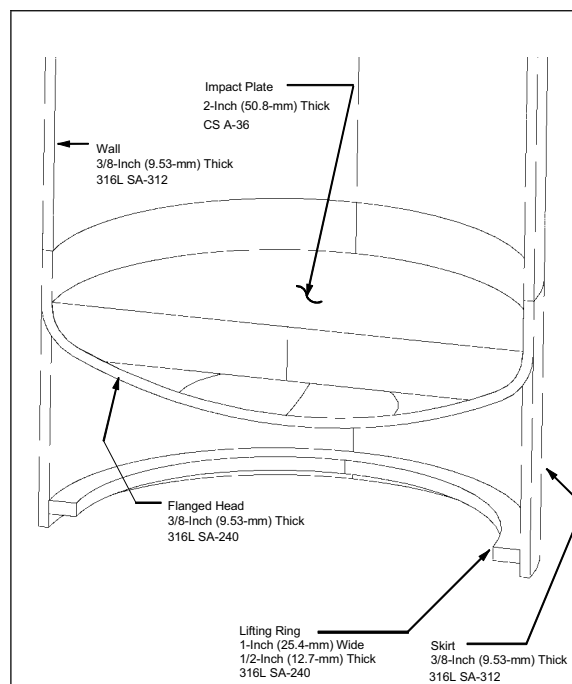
18-in. (457-mm) canister lower end (section view).
